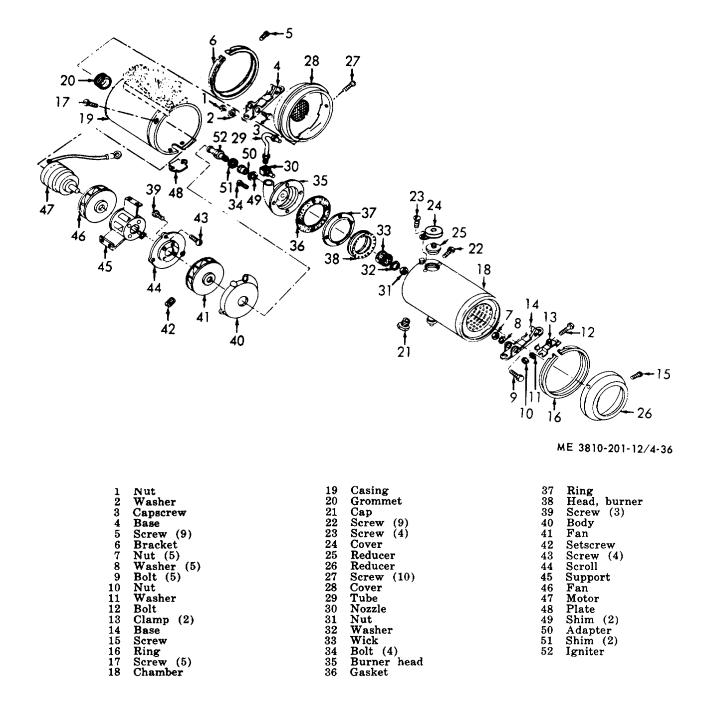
Personnel or engine heater, disassembly and reassembly.
